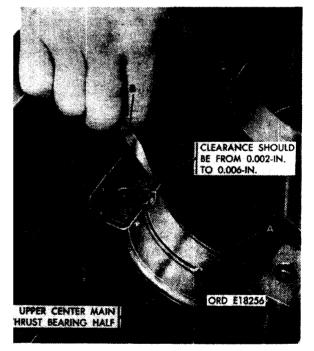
CHECKING CLEARANCE BE-TWEEN UPPER CENTER MAIN THRUST SLEEVE BEARING HALF AND BEARING BORE FLANGE OF CYLINDER AND CRANKCASE.
